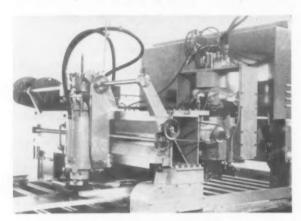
This Onsrud A-72 Invomill was designed and built specifically to machine skins and structures required for jet aircraft.
